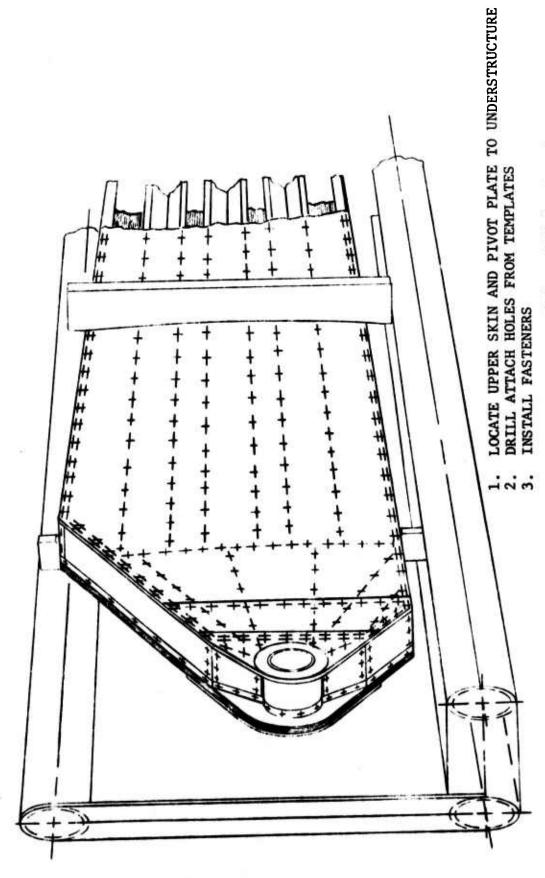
Secondary Manufacturing Final Assembly Upper Skin and Understructure
